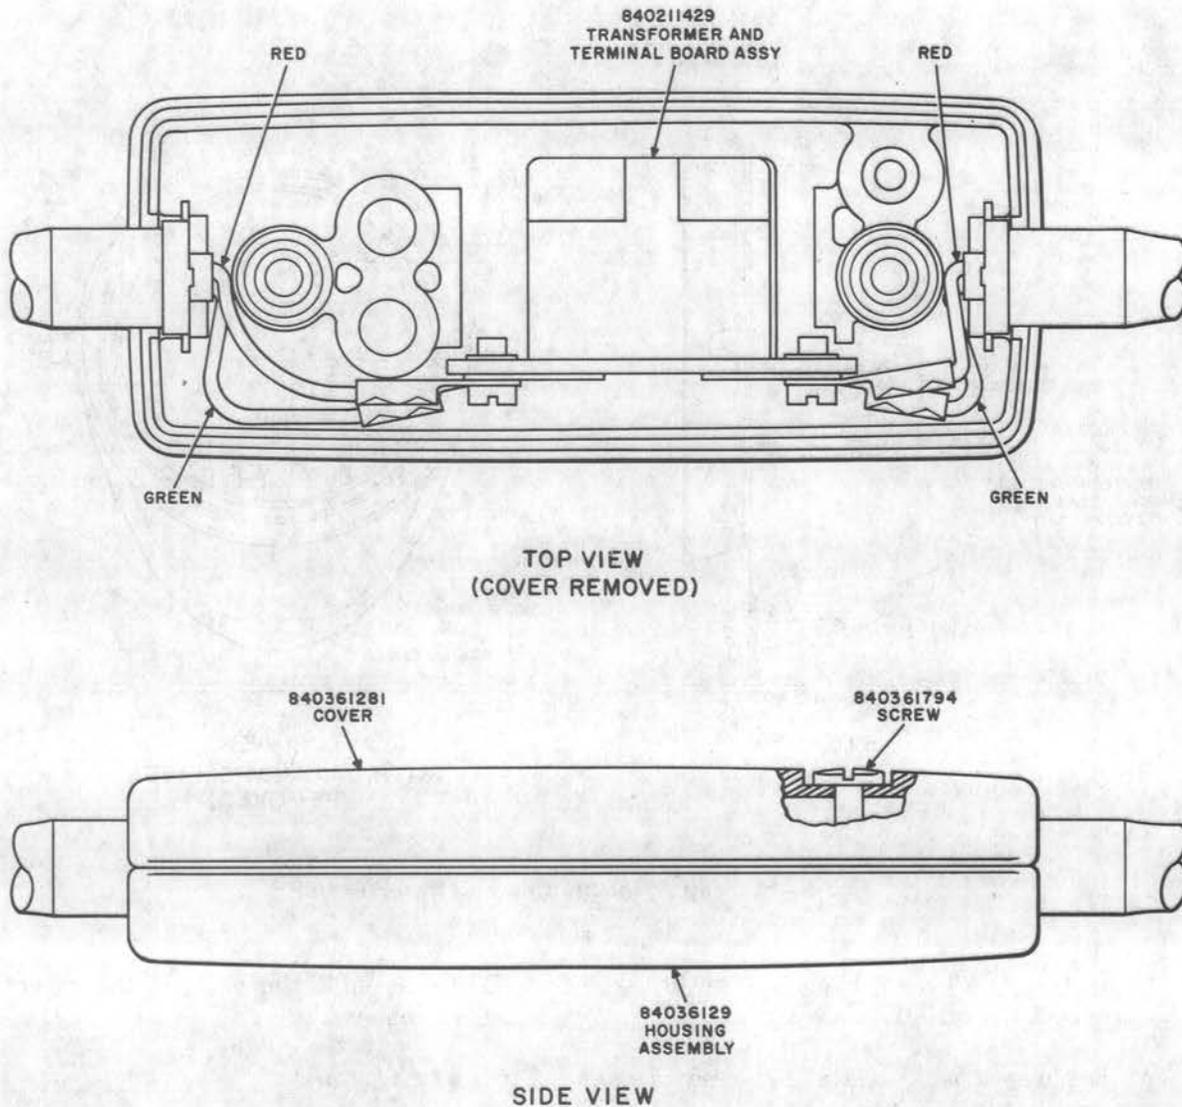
Transformer Housing Assembly and Cover (Part of 1023A Headset)
